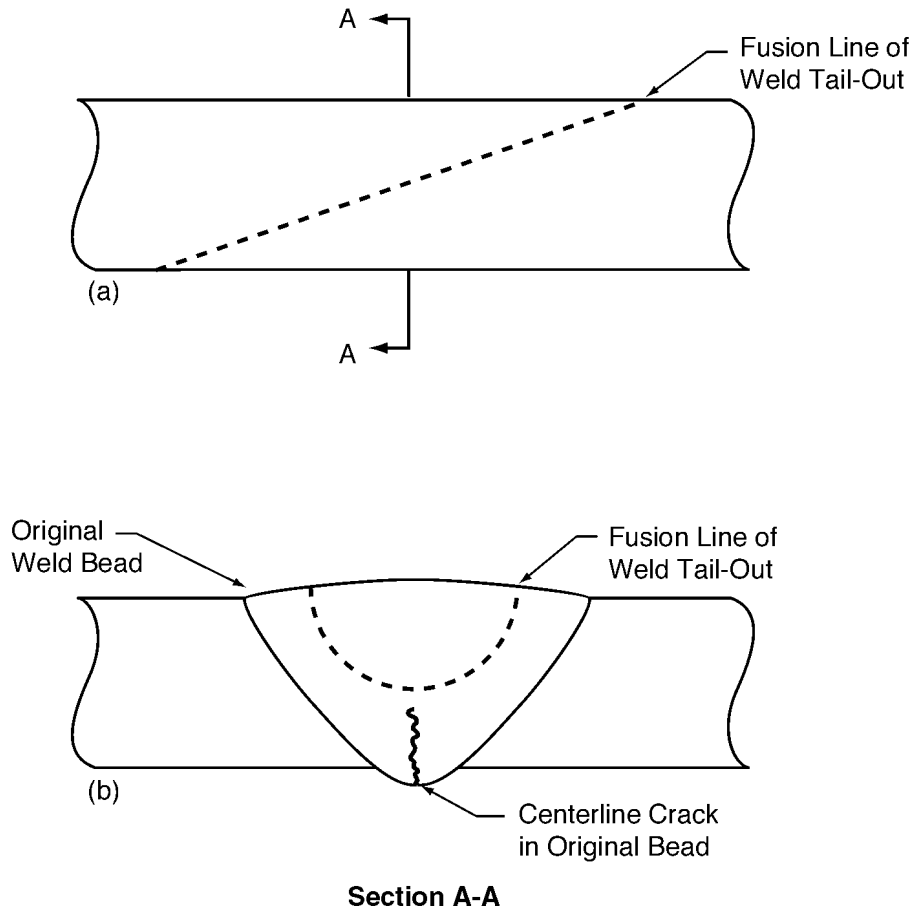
Schematic drawing of Galileo/Ulysses weld cracking.
